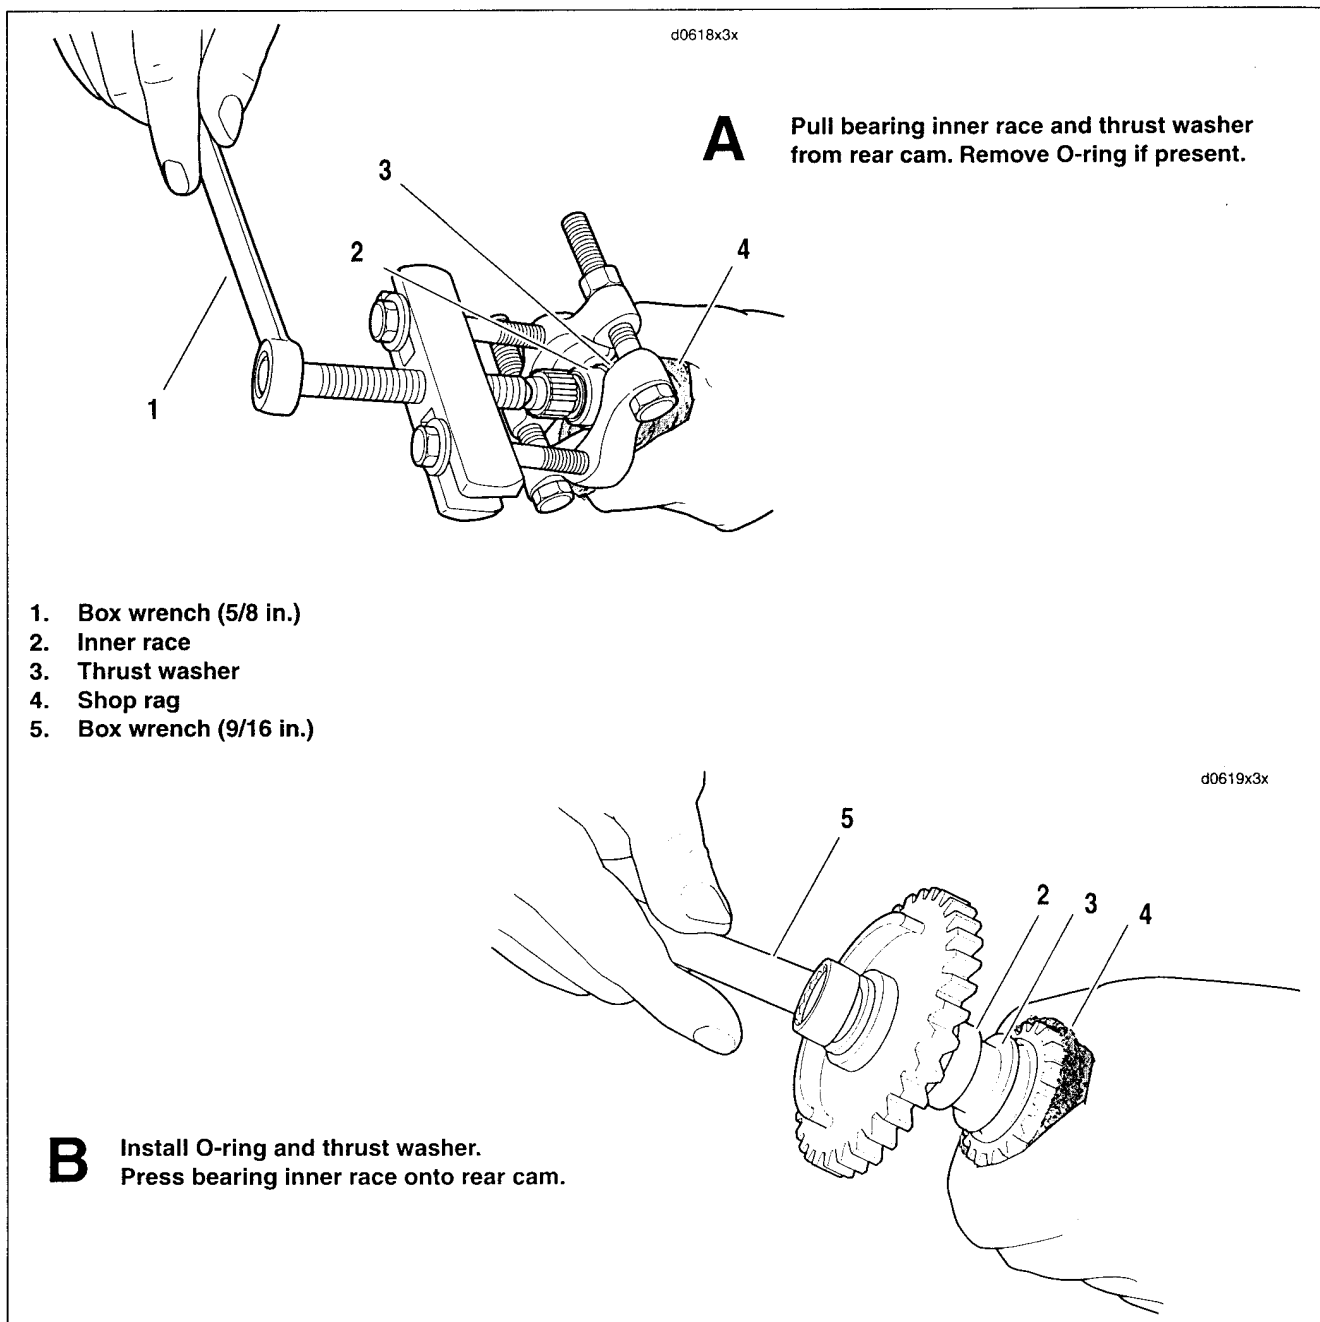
Remove/Install Bearing Inner Race (With O-Ring and Thrust Washer) Onto Rear Camshaft
